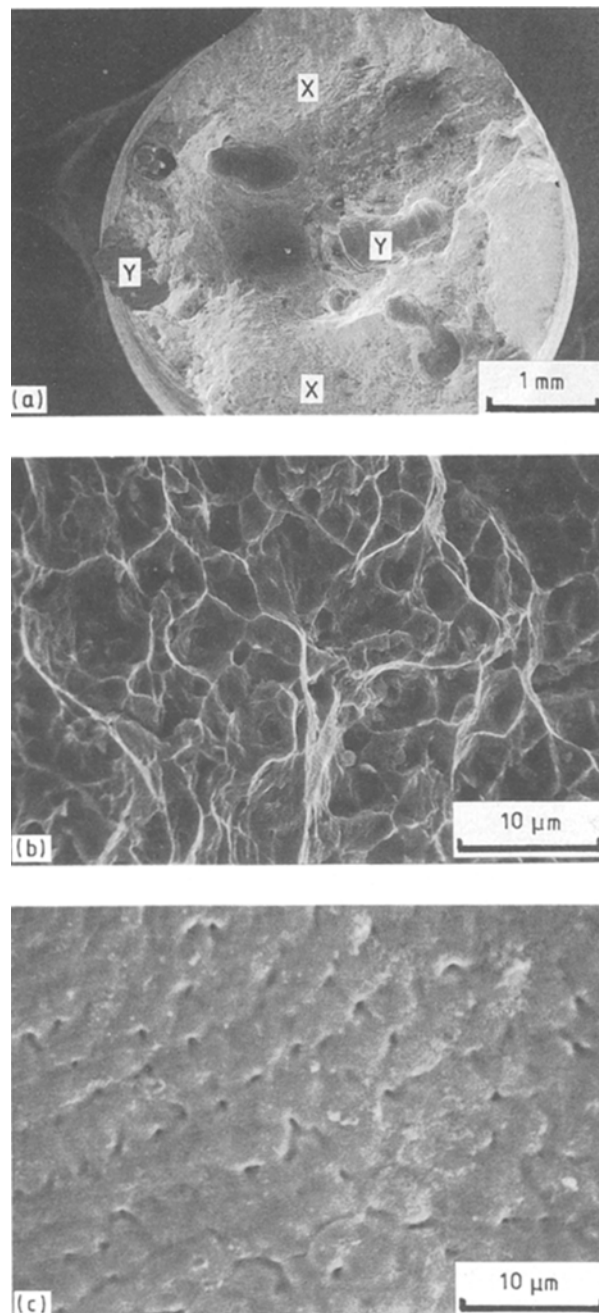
SEM fractographs of the laser-welded Fe-28Mn-5Al-1C alloy after tensile tests: (a) low-magnification fractograph; (b) dimpled fracture in the positions as marked by X in (a), (c) cleavage fracture in the positions as marked by Y in (a).
